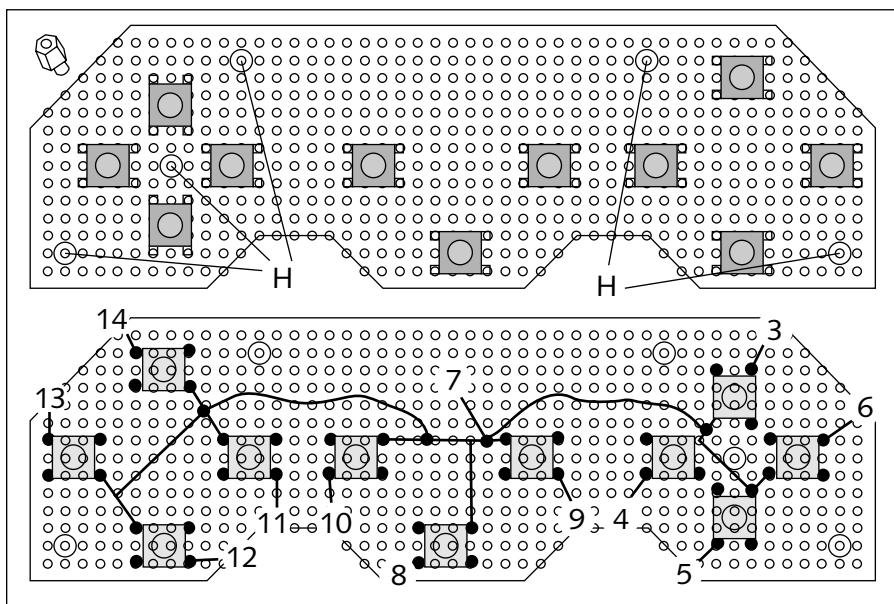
Placement of tact switches (top drawing) and wiring on the back (bottom drawing).
